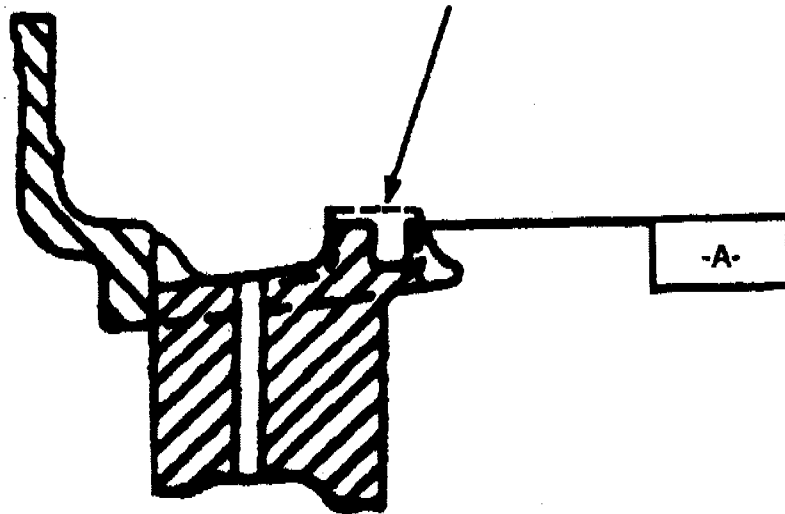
Second Stage Gas Producer Nozzle - Applying Brazing Alloy to Vane-to-Shroud Joints.
